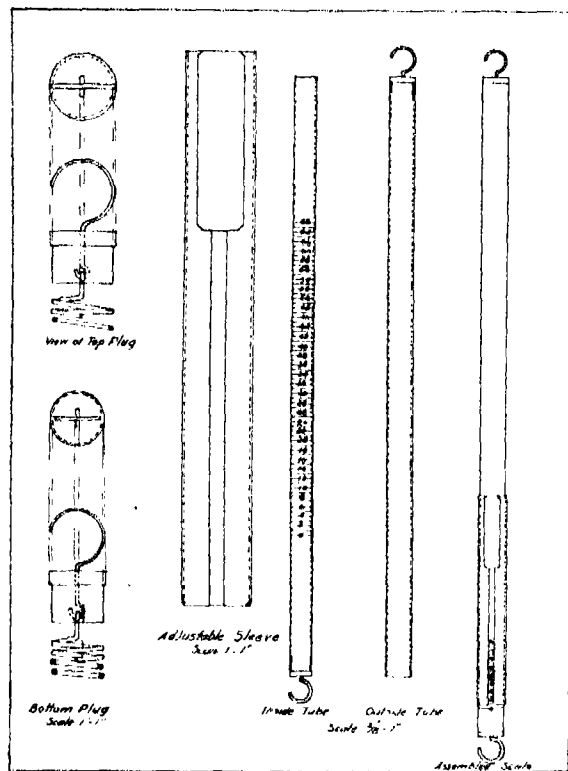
Parts and assembly of tubular spring balance for measuring water content of snow.
